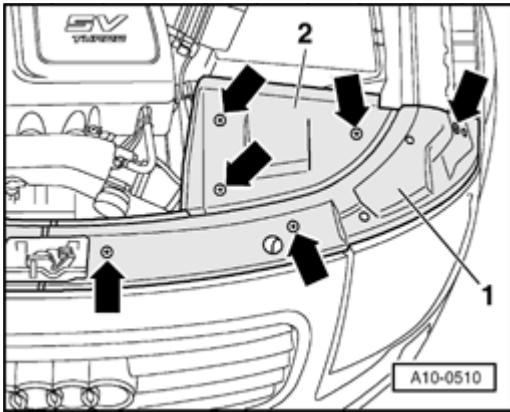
Removing Left-Hand Cover Panels On Lock Carrier And Battery
